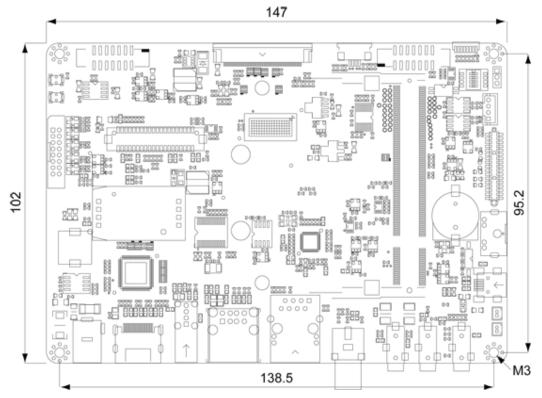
Blizzard Baseboard dimensions (Dimensions in mm)
